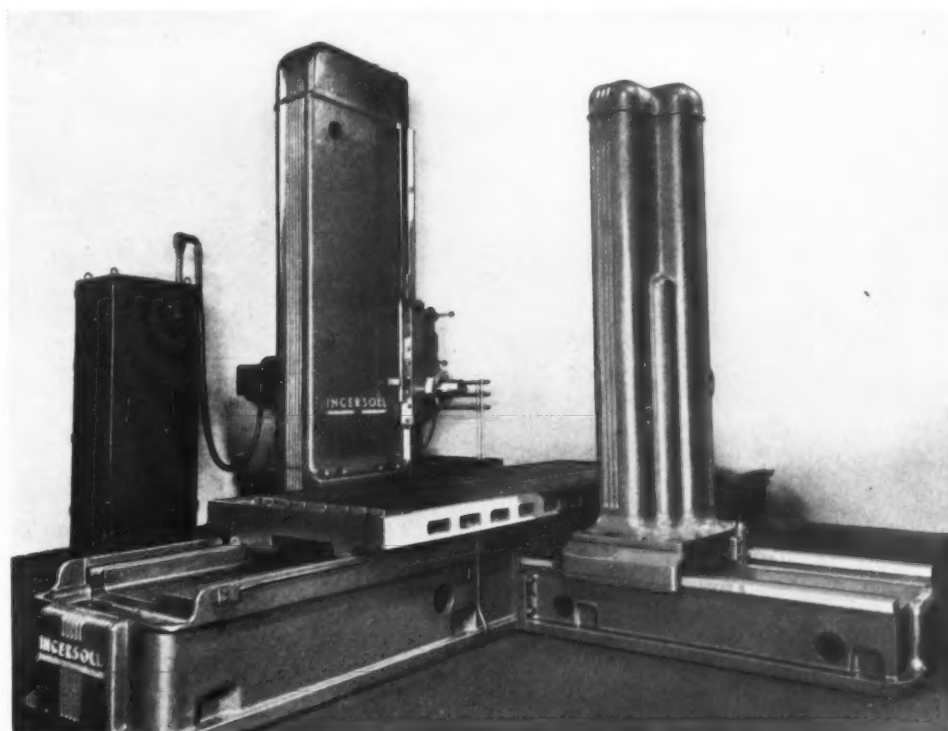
Machine Tools can be Modern in Appearance, as well as in Mechanical Details
